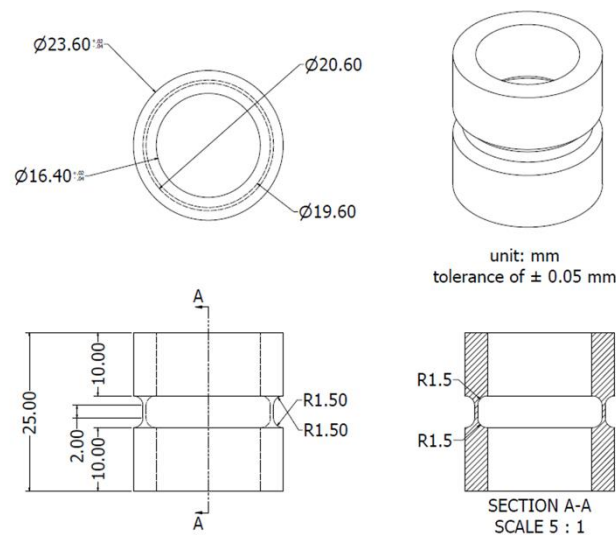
The drawing of the hollow, thin-walled cylindrical specimens for pure shear and compression-shear tests.
